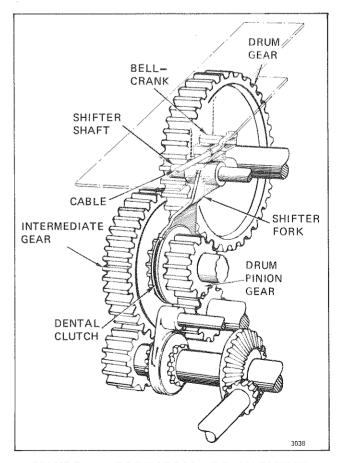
FREE-SPOOL ARRANGEMENT
